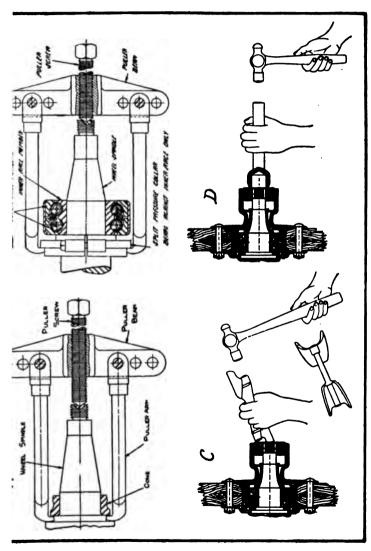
Methods of Removing and Installing Ball Bearings Without Damaging Them.
